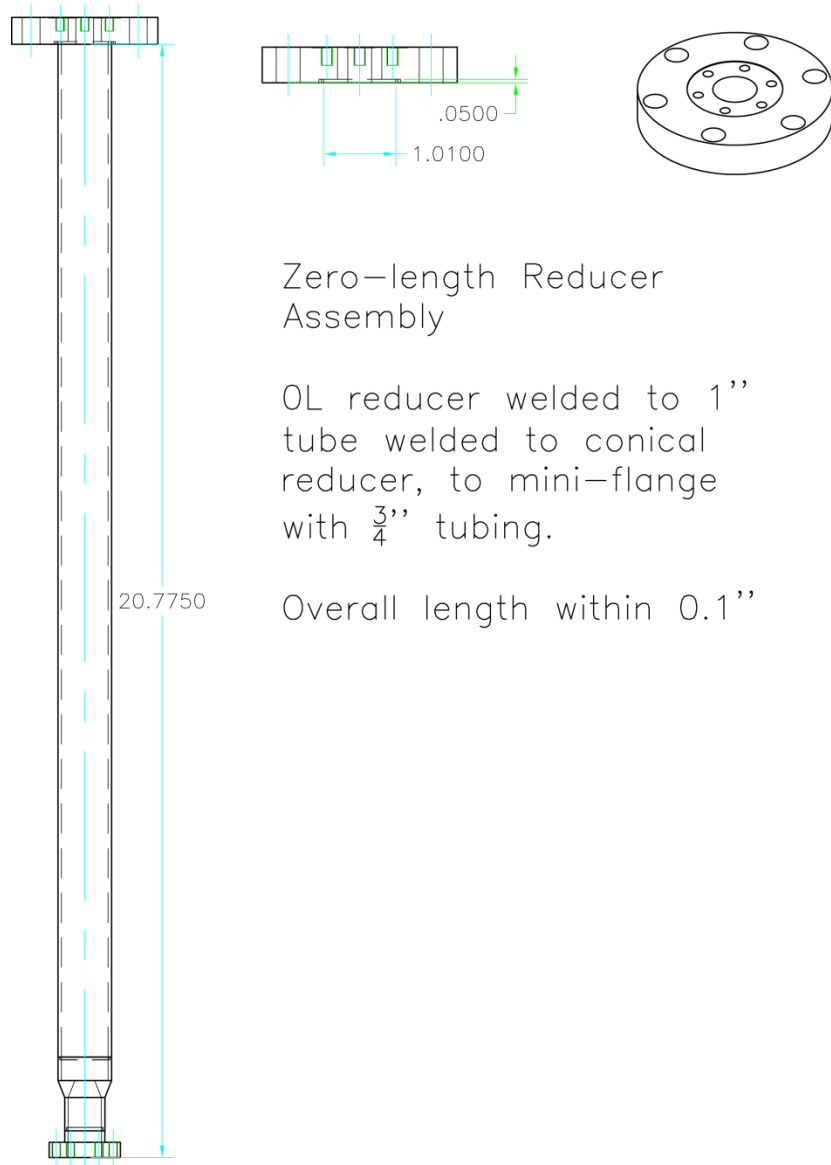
Generation 2 purifier zero-length reducer assembly
